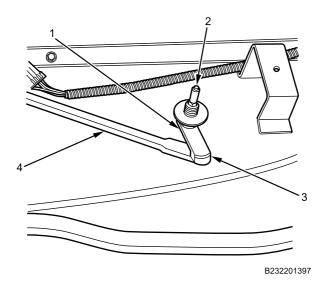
Windshield Wiper Linkage and Idler Shaft Alignment.
